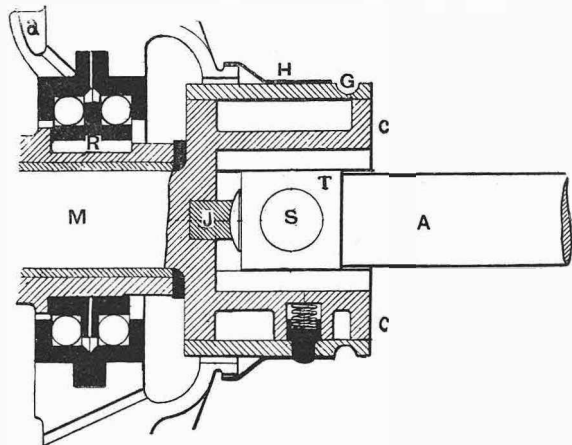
Mounting and articulation of universal joint to shafts rotating road wheels.
